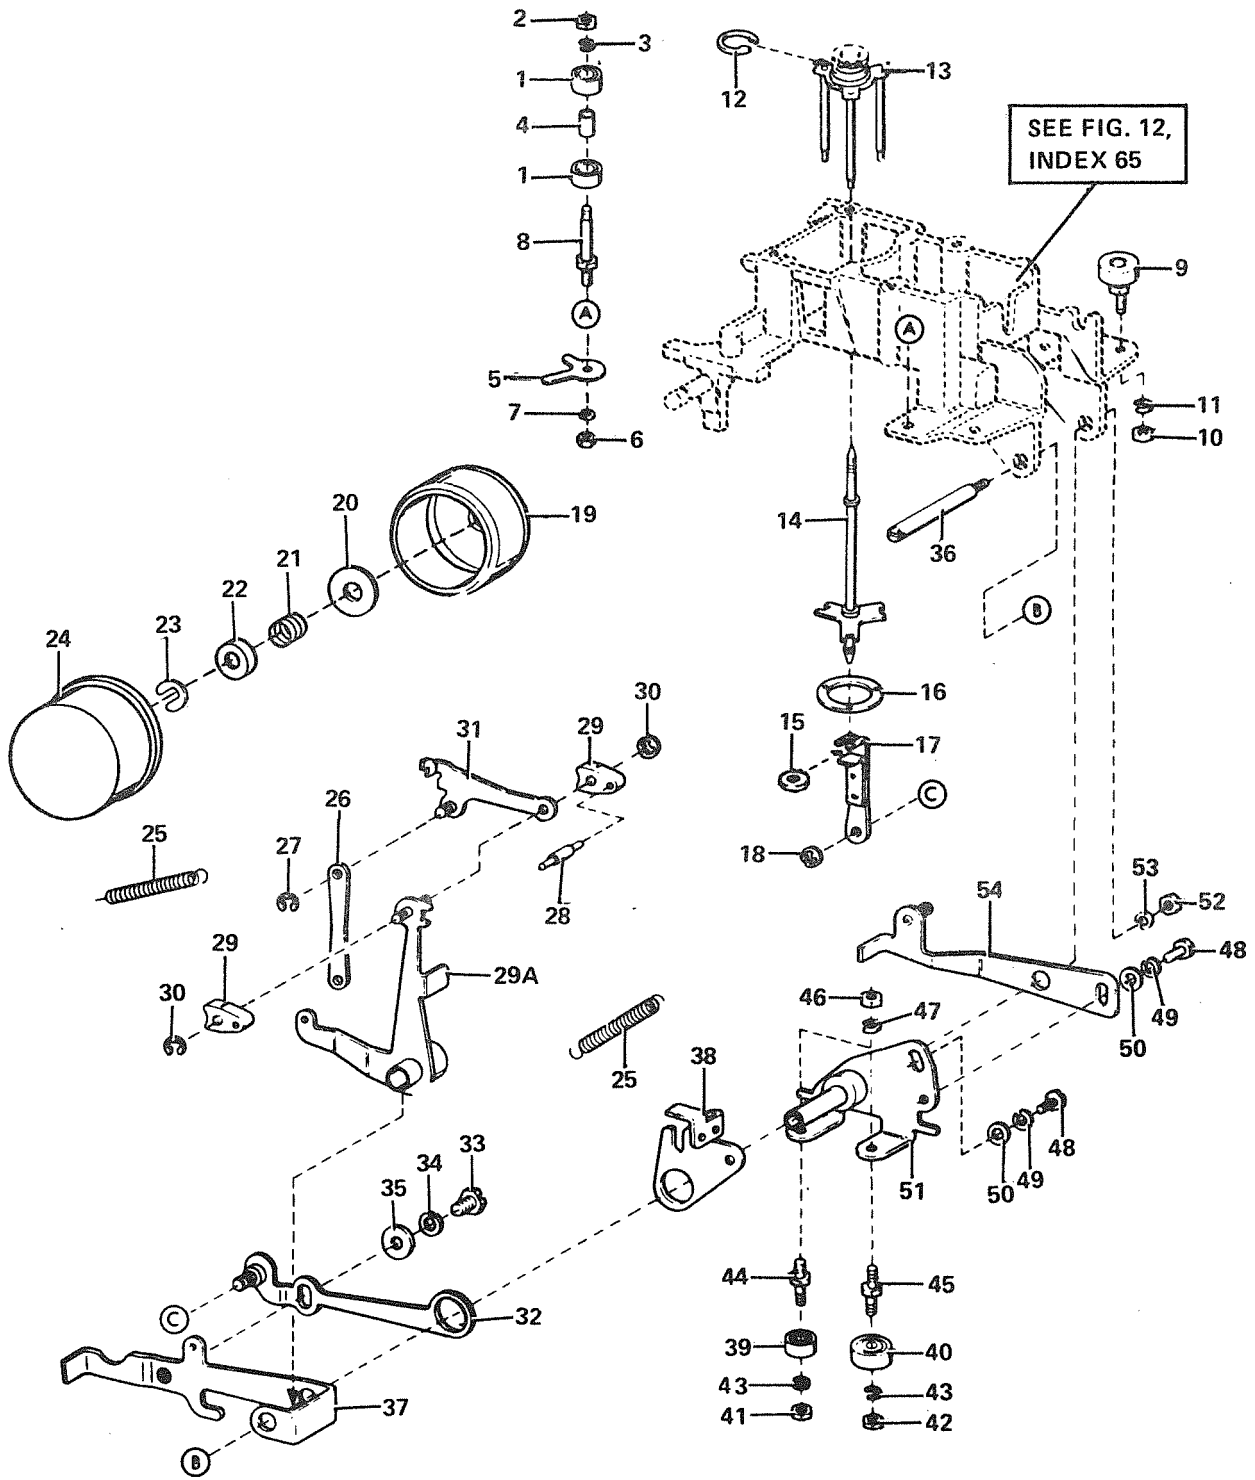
PRINTER- CARRIAGE POWER RAIL MECHANISM. SEE LIST 13.
